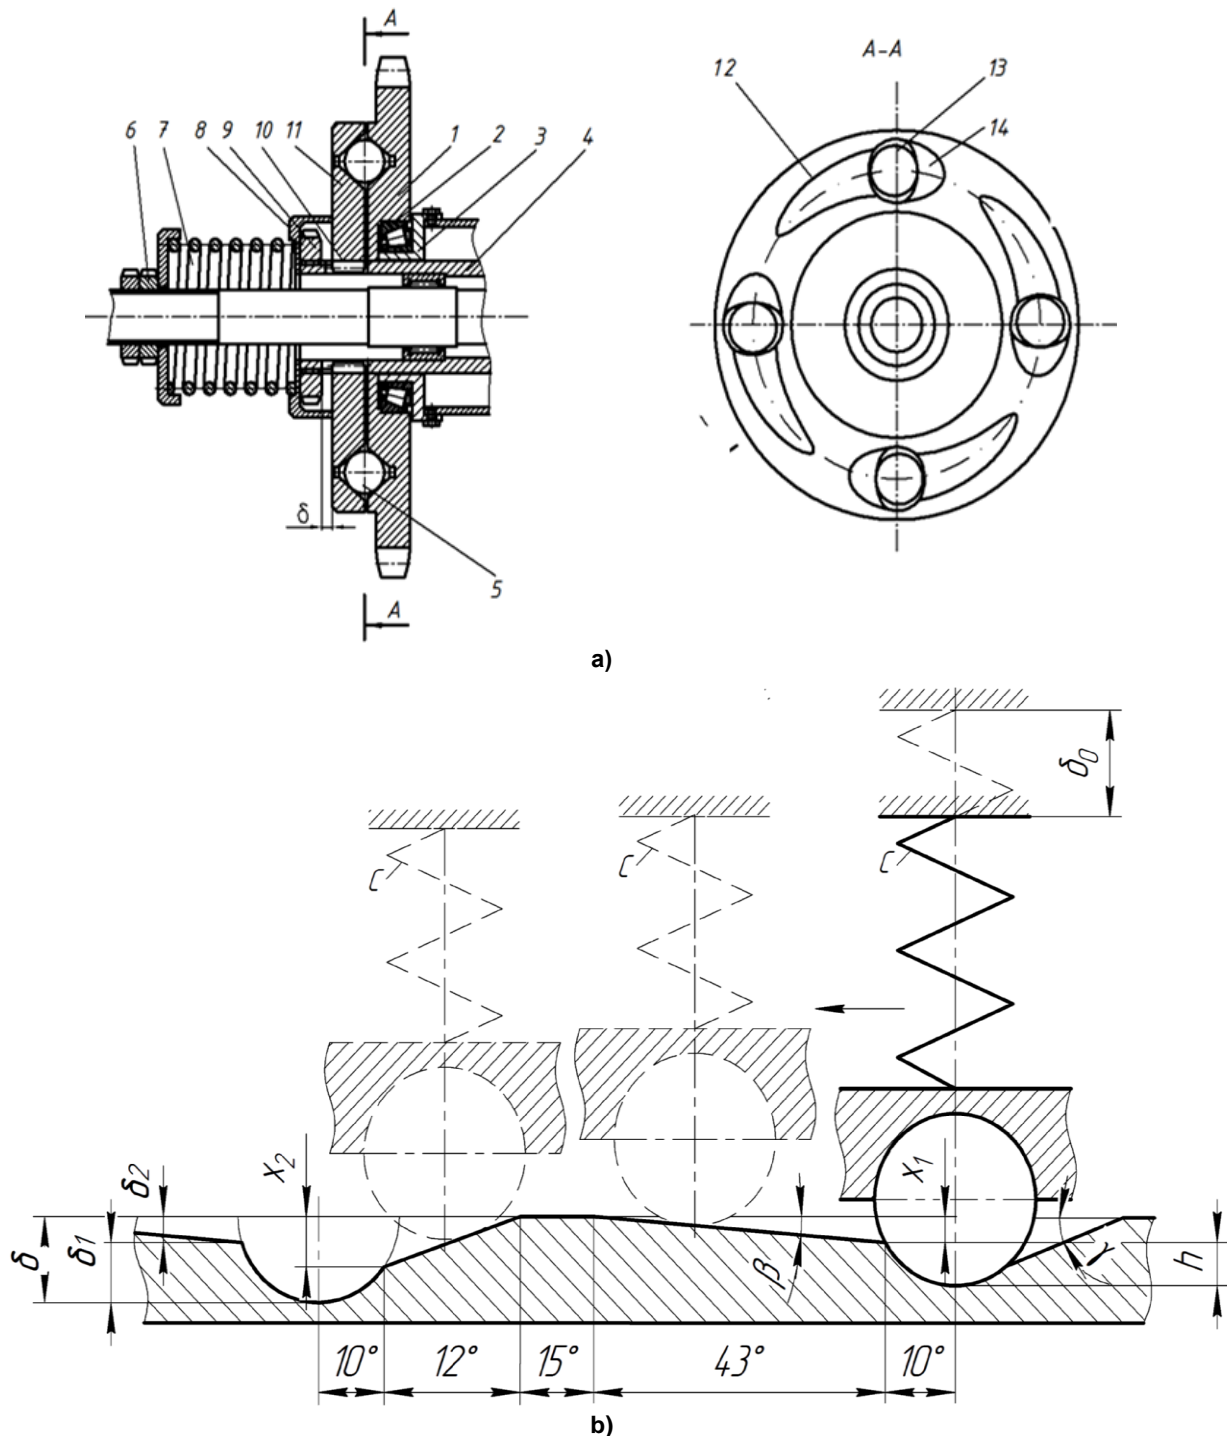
The constructive scheme of the safety device (a) and the scheme of the reamer of the working surface (b) / Конструктивна схема запобіжного пристрою (а) та схема розгортки робочої поверхні ведучої півмуфти (б)
